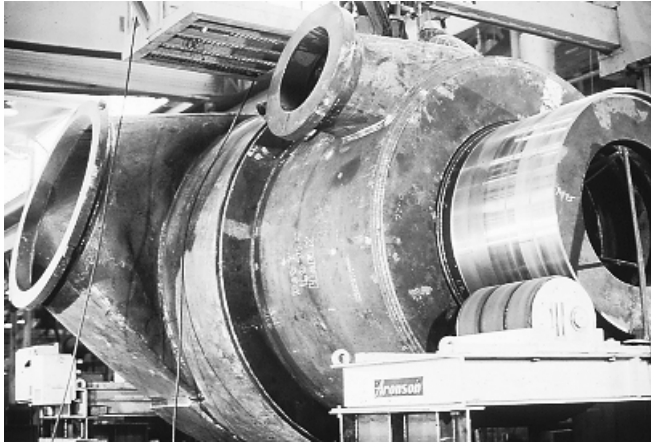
Case rotation fixturing and girth welding. (*Dresser-Rand Company, Olean, N.Y.*)
